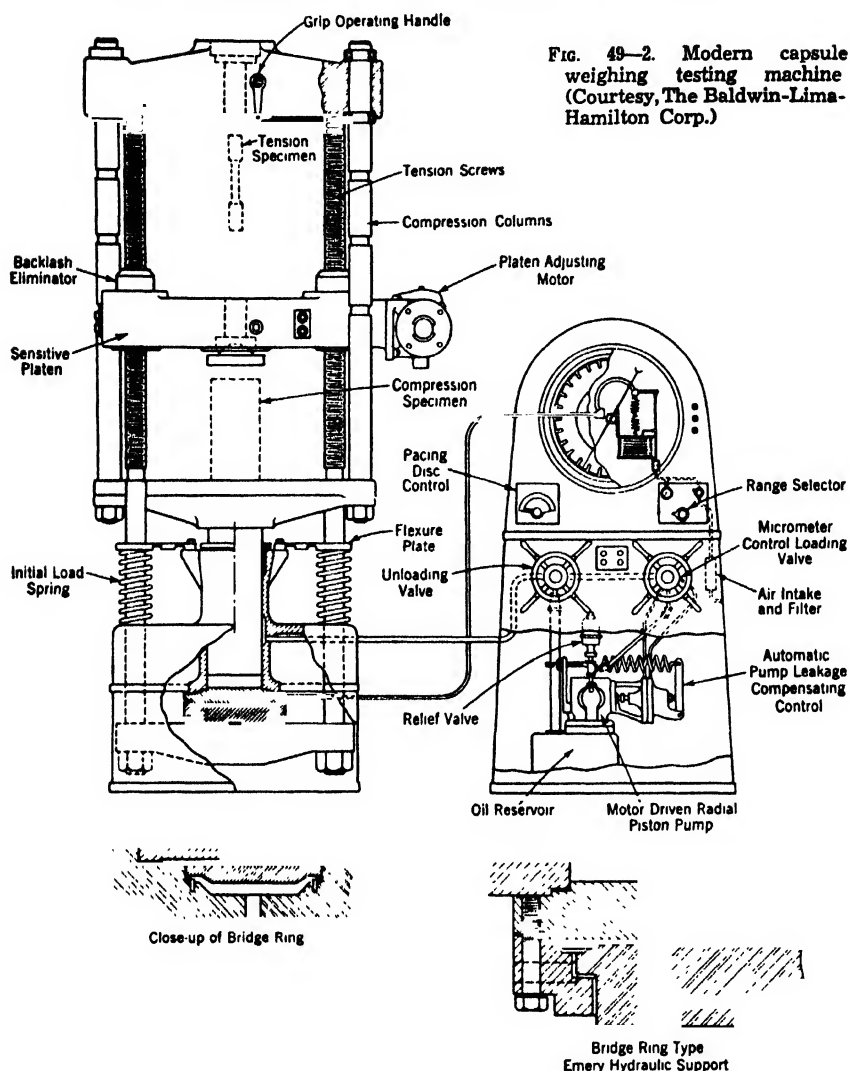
Modern capsule weighing testing machine (Courtesy, The Baldwin-Lima-Hamilton Corp.)
